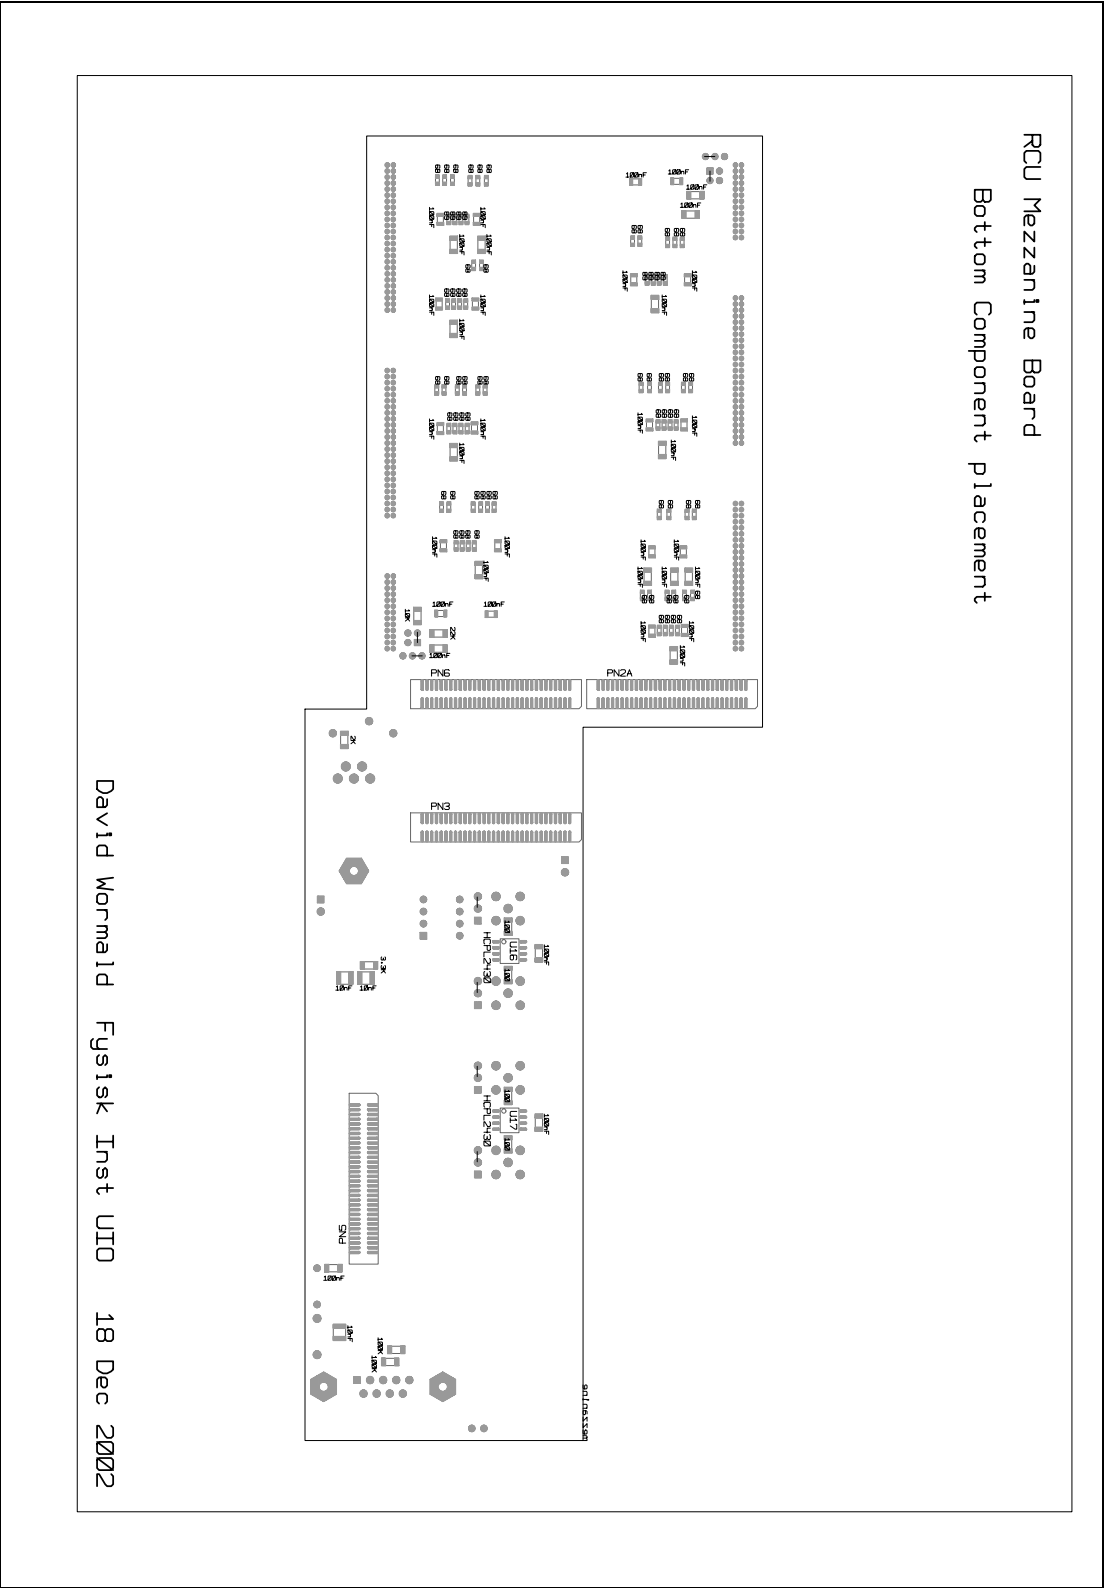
The RCU2 multipurpose mezzanine card, bottom side.
